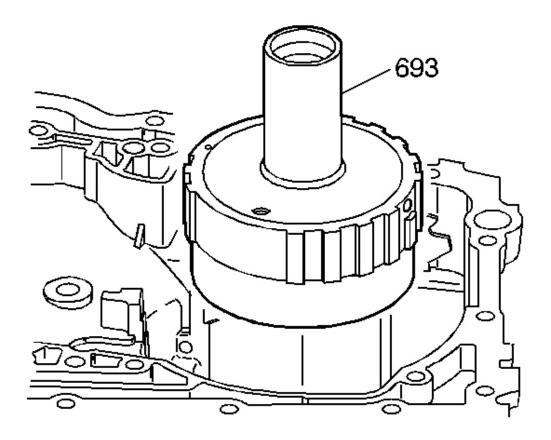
View Of Differential Carrier Internal Gear Assembly Courtesy of GENERAL MOTORS CORP.
